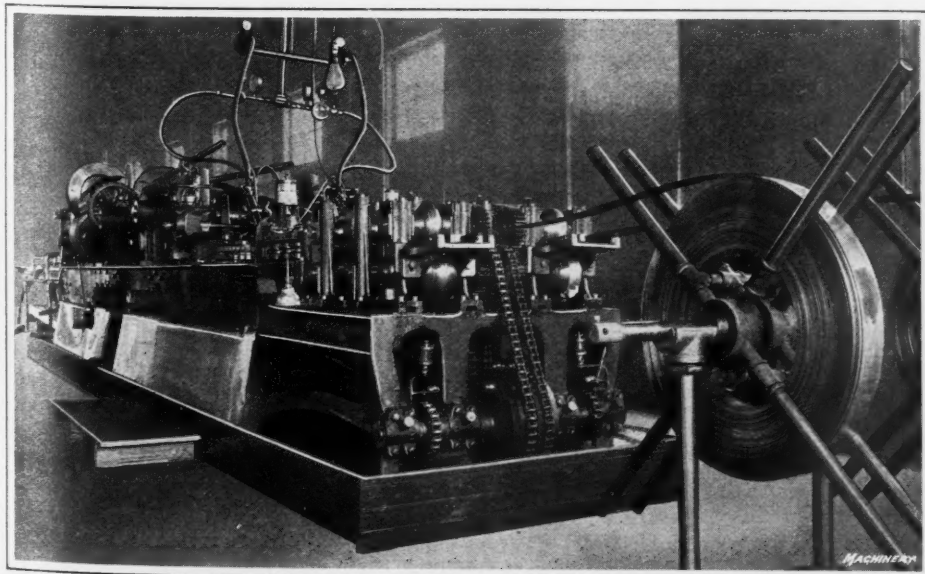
Machine used by Elyria Iron & Steel Co., of Cleveland, Ohio, for Use in automatically converting Flat Steel Ribbon Stock into Welded Steel Tubing
